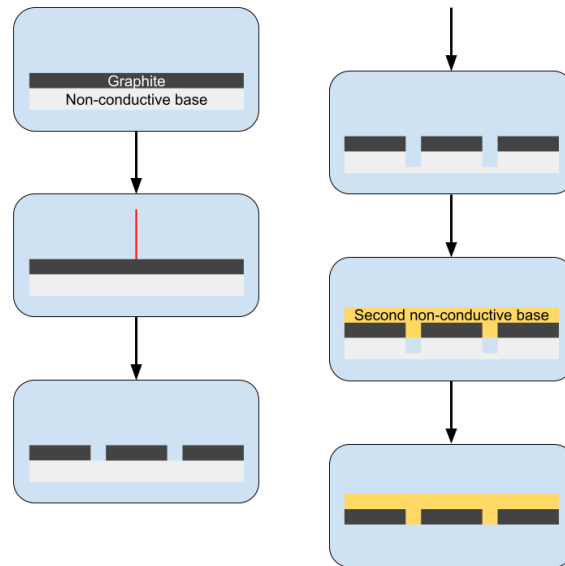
A side view of the steps required for segmenting a graphite plate using a laser cutter.
